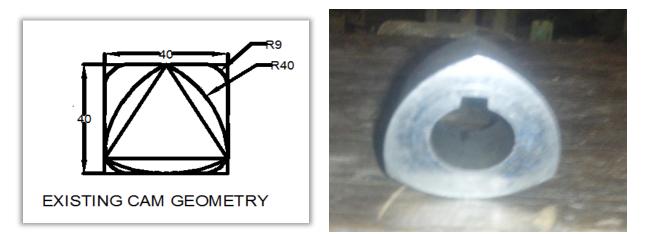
AutoCAD drawing of existing cam geometry Figure 9. Actual existing cam geometry
